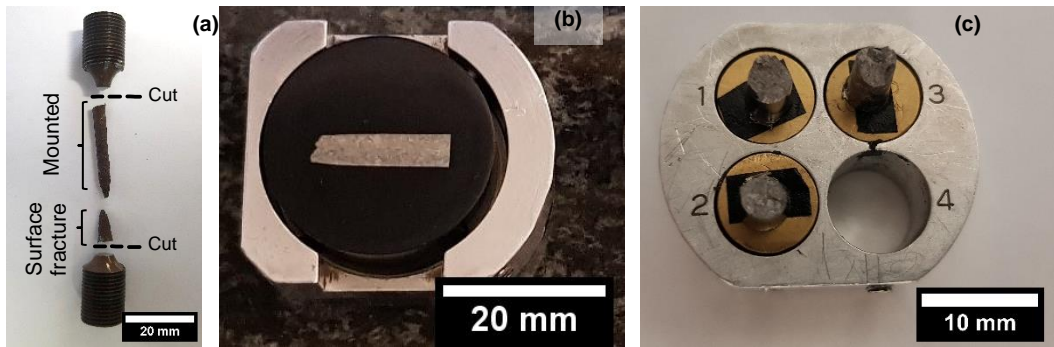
(a) Tensile specimen prepared for analysis, (b) a mounted cross-section of a tensile specimen in a SEM sample holder, and (c) fractured tensile surface setup to analyse the fracture surface using SEM.
